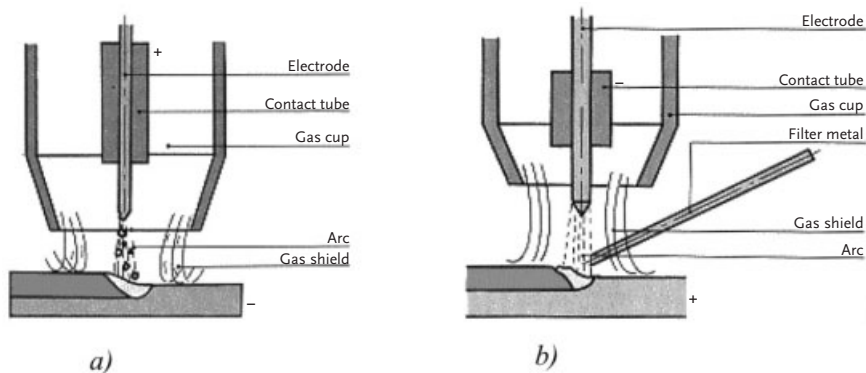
The principles of a) MIG welding and b) TIG welding. (Reprinted from ref. [51.3] with permission.)
